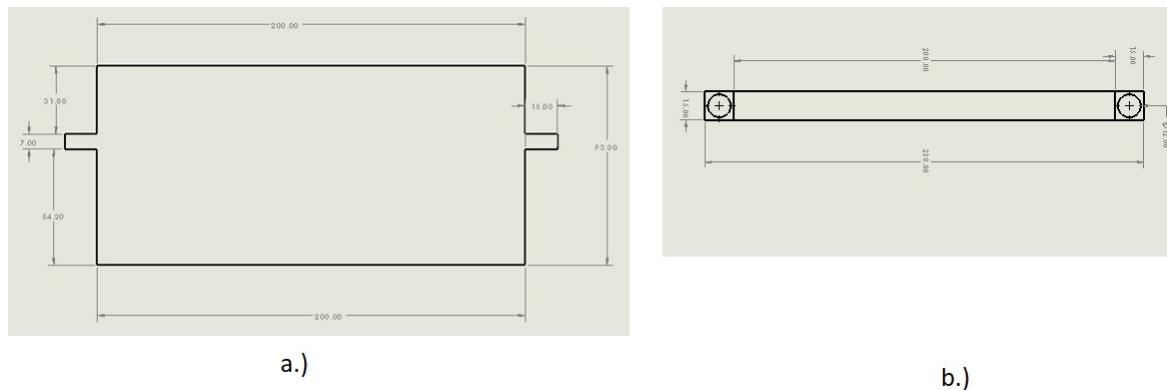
Drawings of final Design of the detachable door a.)Side view b.)Top view
